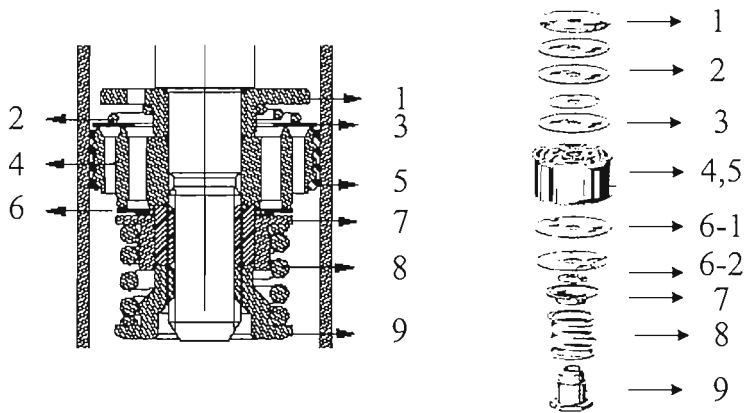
Schematic of disc-spring valve and its components. 1. support washer, 2. intake spring, 3. intake valve, 4. piston, 5. piston ring, 6-1. orifice disc, 6-2. orifice valve, 7. spring seat and torque washer, 8. valve spring, 9. rod nut [34].
